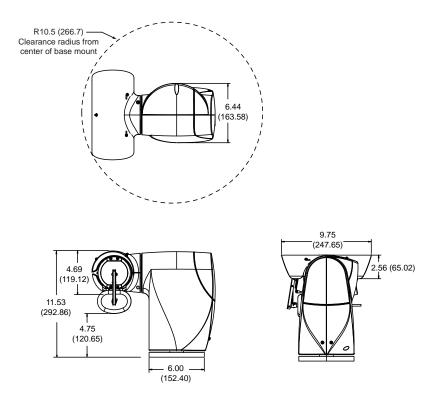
Dimensions, 3960^{HD}/3960^{SD} series with optional wiper. Dimensions in inches (mm)
